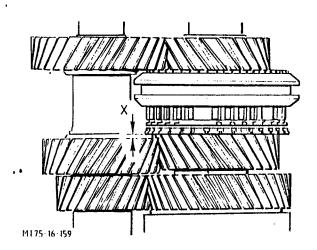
Distance "X" between countershaft gear and synchronizer cone on 3rd gear cog.
